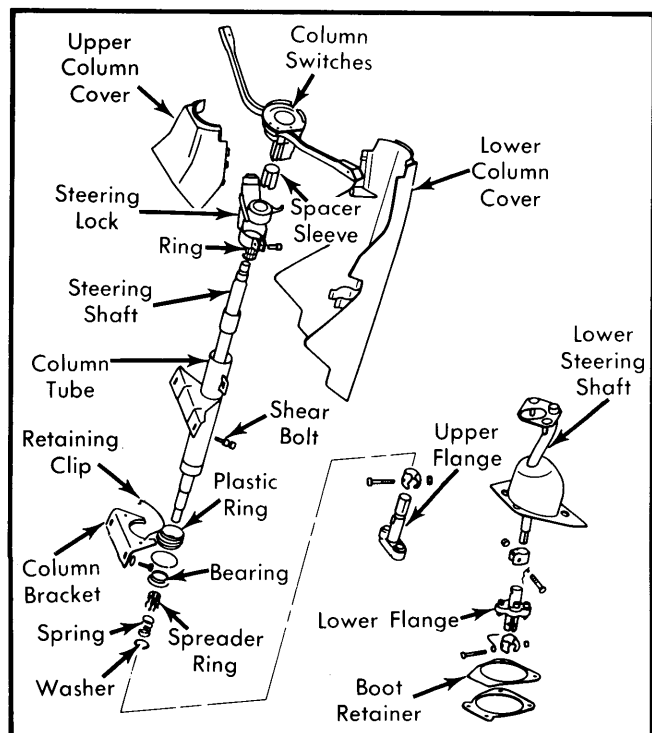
Exploded View of Volkswagen Vanagon Steering Column Assembly
